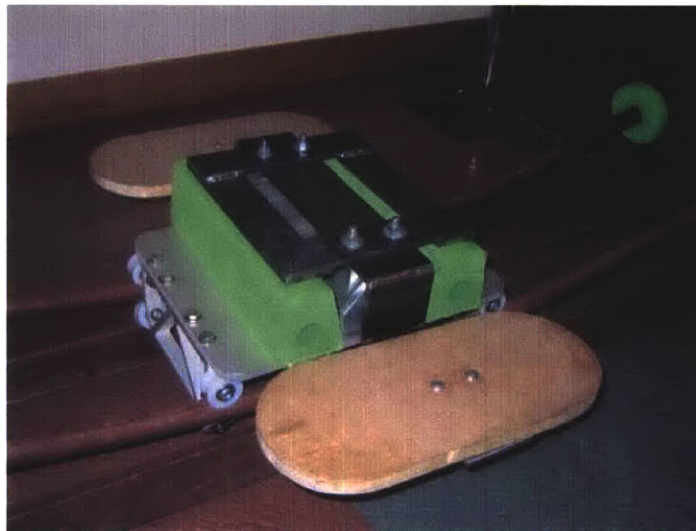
Prototype Carriage with Complete Roll Axis Module
